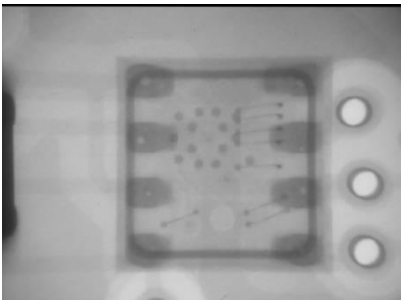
But x-ray imaging reveals properly deposited solder paste, within voiding specifications, despite the small footprint of the board.
